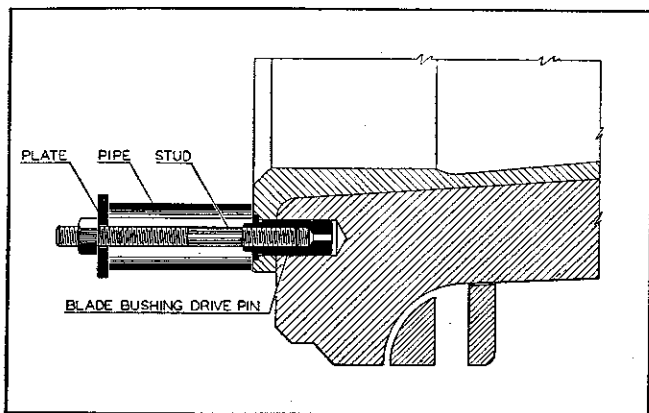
Fixture for Pulling Blade Bushing Drive Pin
